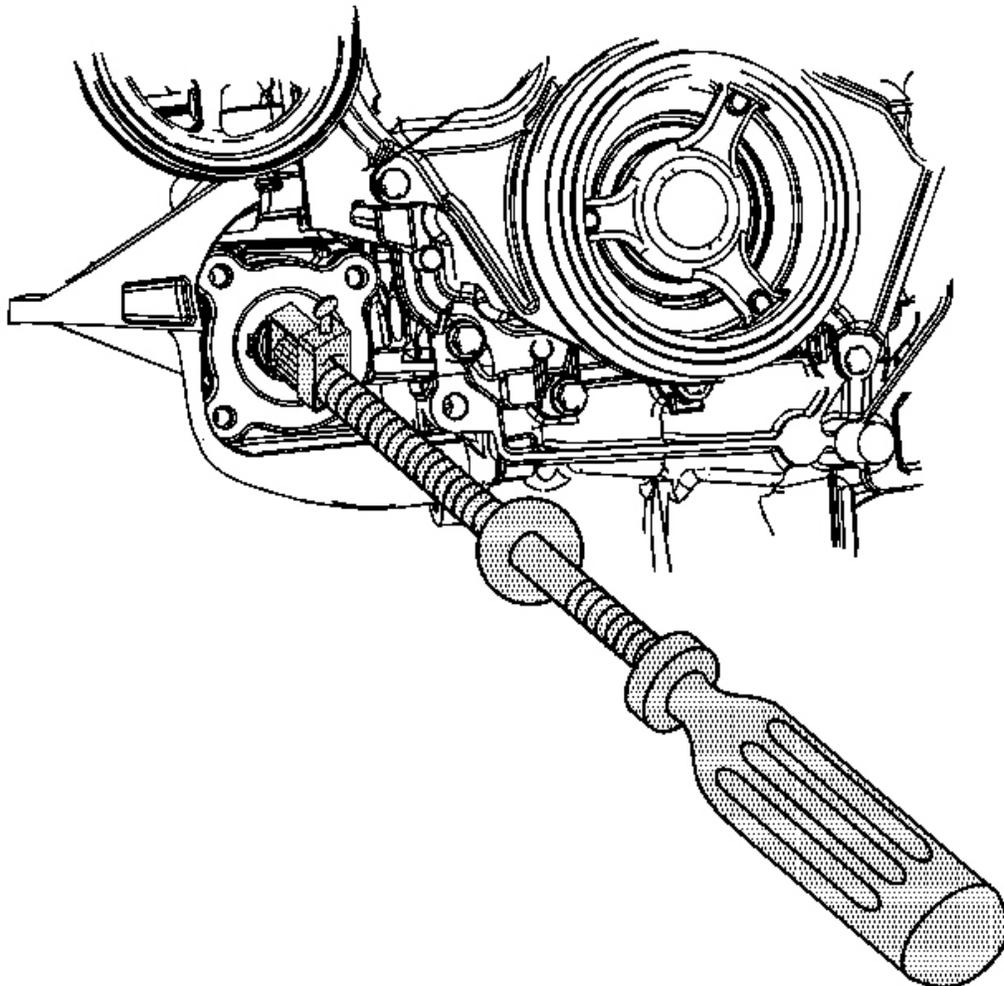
View Of Intermediate Drive Shaft Mounting Bolts
